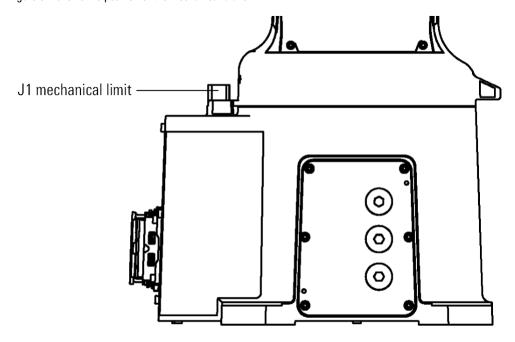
Mechanical brake on AIR7-920B manipulator
